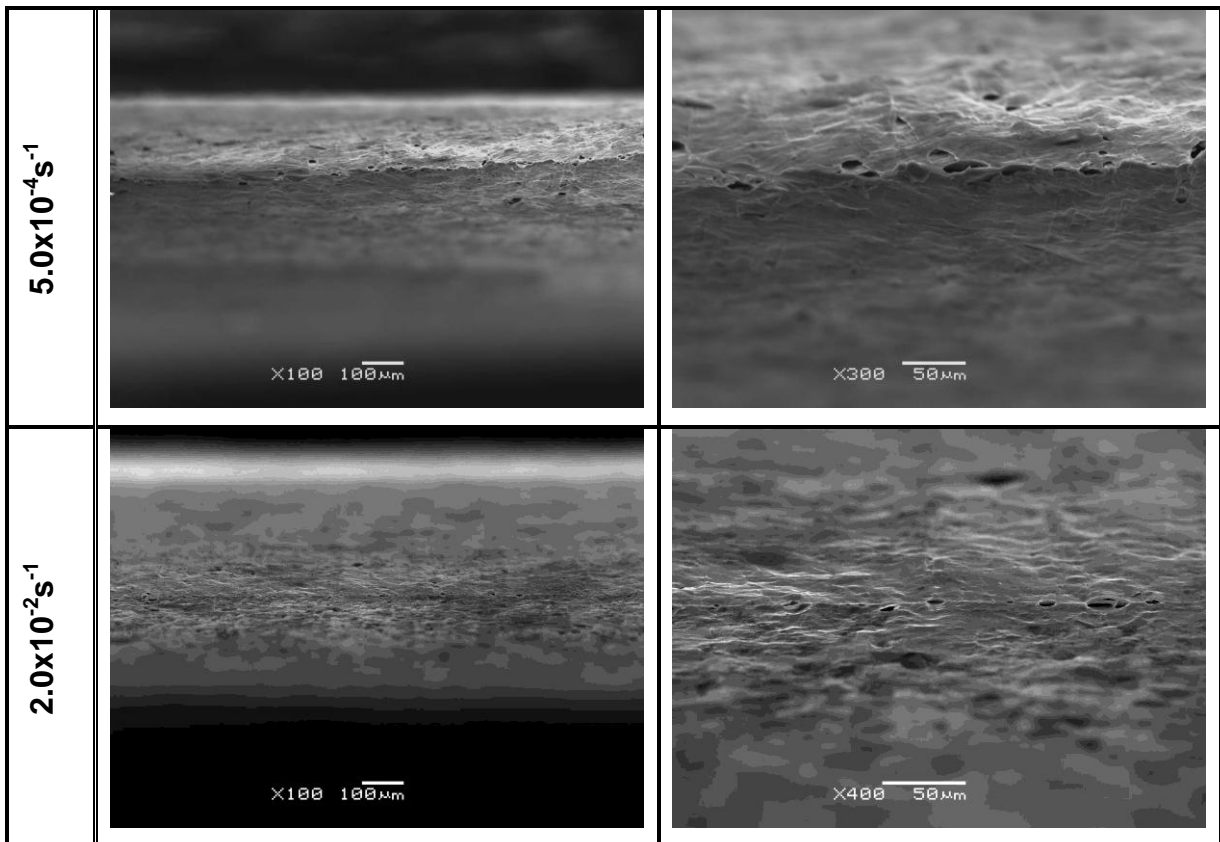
T4P sheet tensile tested at 350°C fracture surface images (SE mode).
